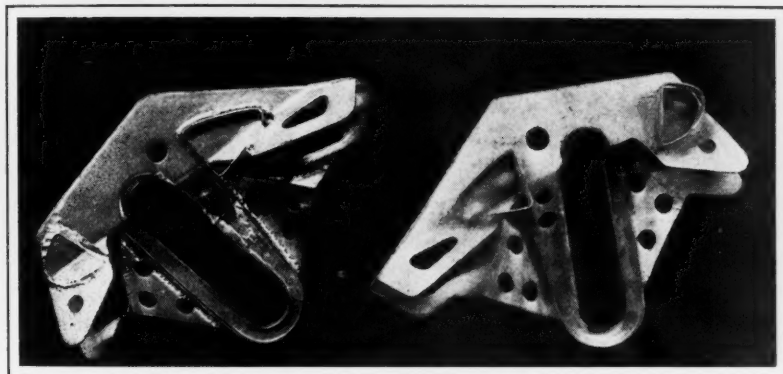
Examples of Welded Aircraft Fittings
